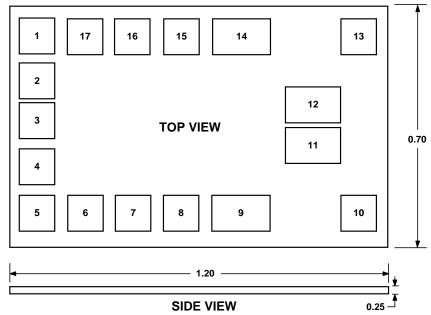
17-Pad Bare Die Sales [CHIP] Dimensions shown in millimeters
